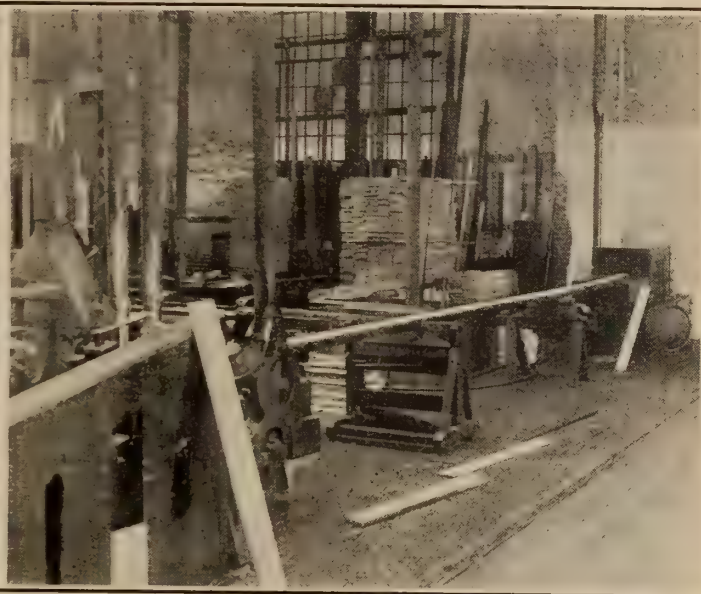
Boards leaving matcher and passing automatically through painting machine.
